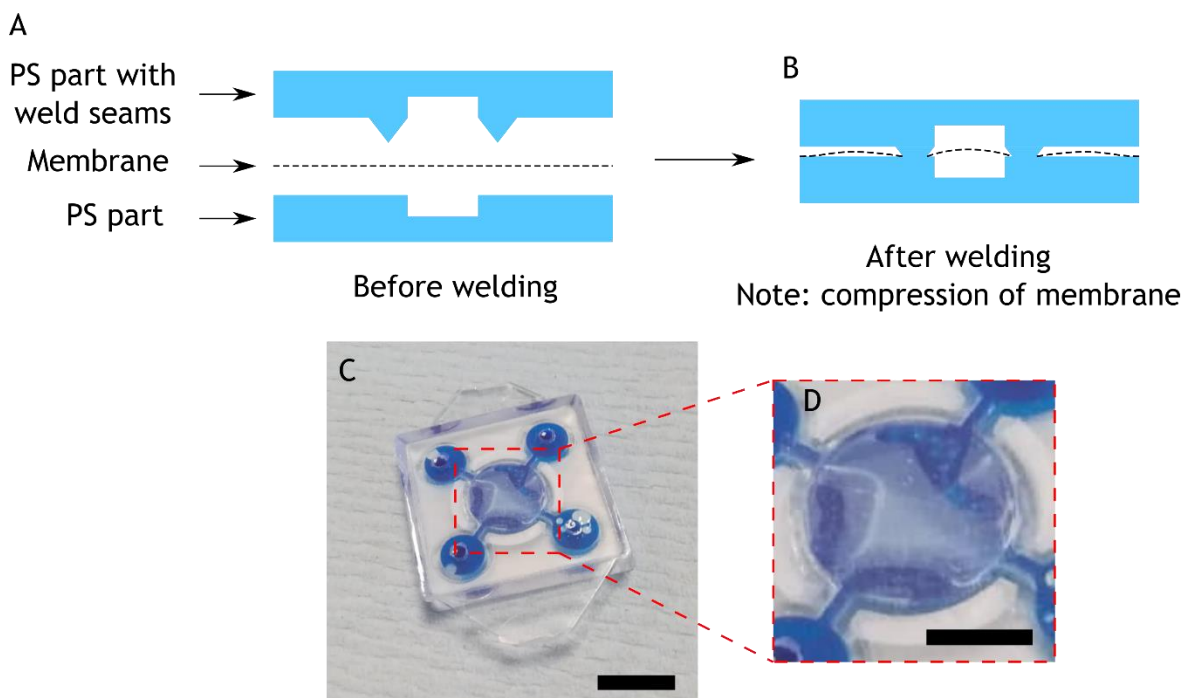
Issues with weld seams and membranes. A shows a schematic of the chip prior to welding while B shows the chip after welding with the compressed membrane. C shows an image of a chip after welding with a compressed and wrinkled membrane. The chip was filled with blue dye to better visualise the membrane. D shows a close up of the chip in C where the compressed membrane can be seen in more detail. Scale bar in C = 10 mm, while D = 5 mm.
